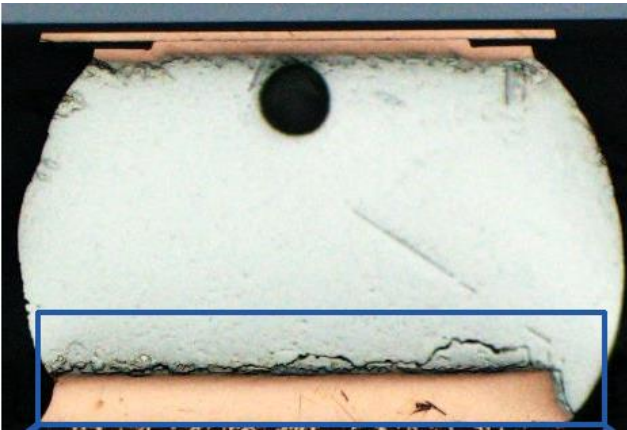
Leg 1 (baseline + SAC405 ball) solder crack at PCB side.
